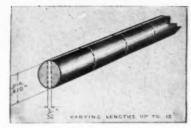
Details and dimensions of part being machined in Fig. 9.
